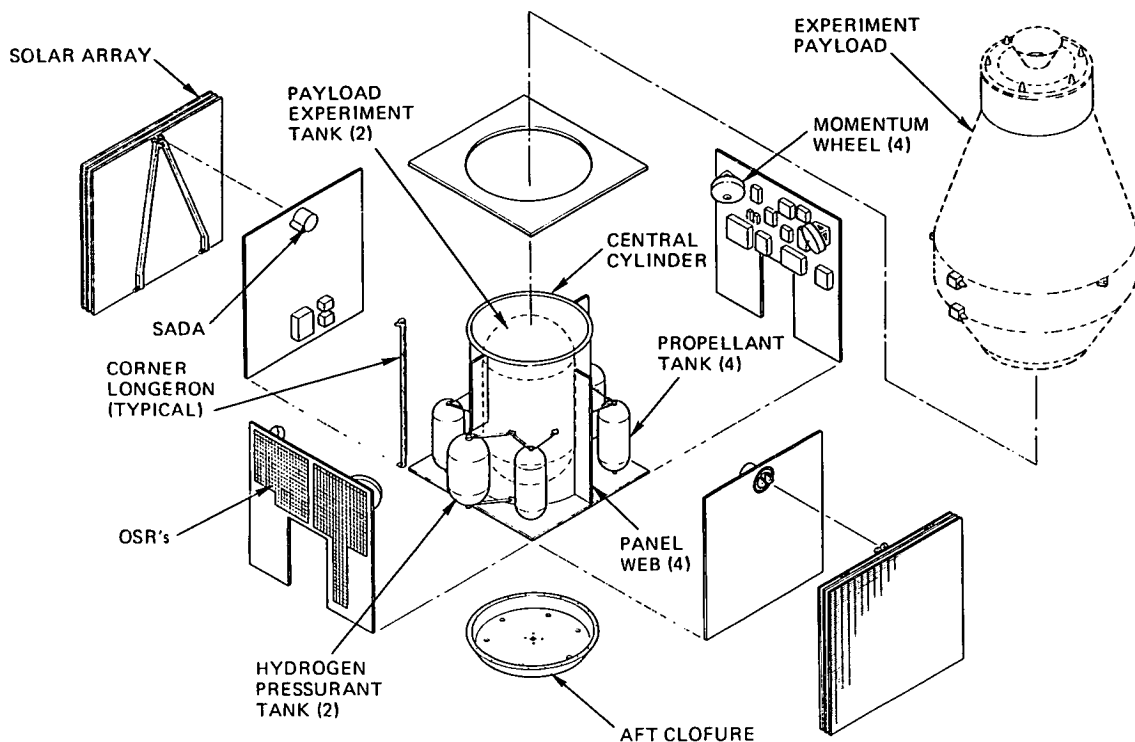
COLD-SAT Spacecraft Bus Exploded View.
